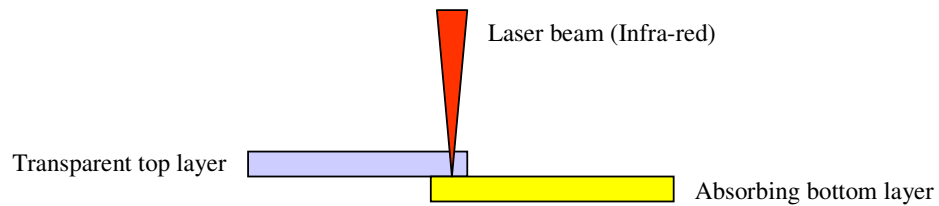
Schematic diagram of laser welding showing transparent top layer, and strongly absorbing bottom layer.
